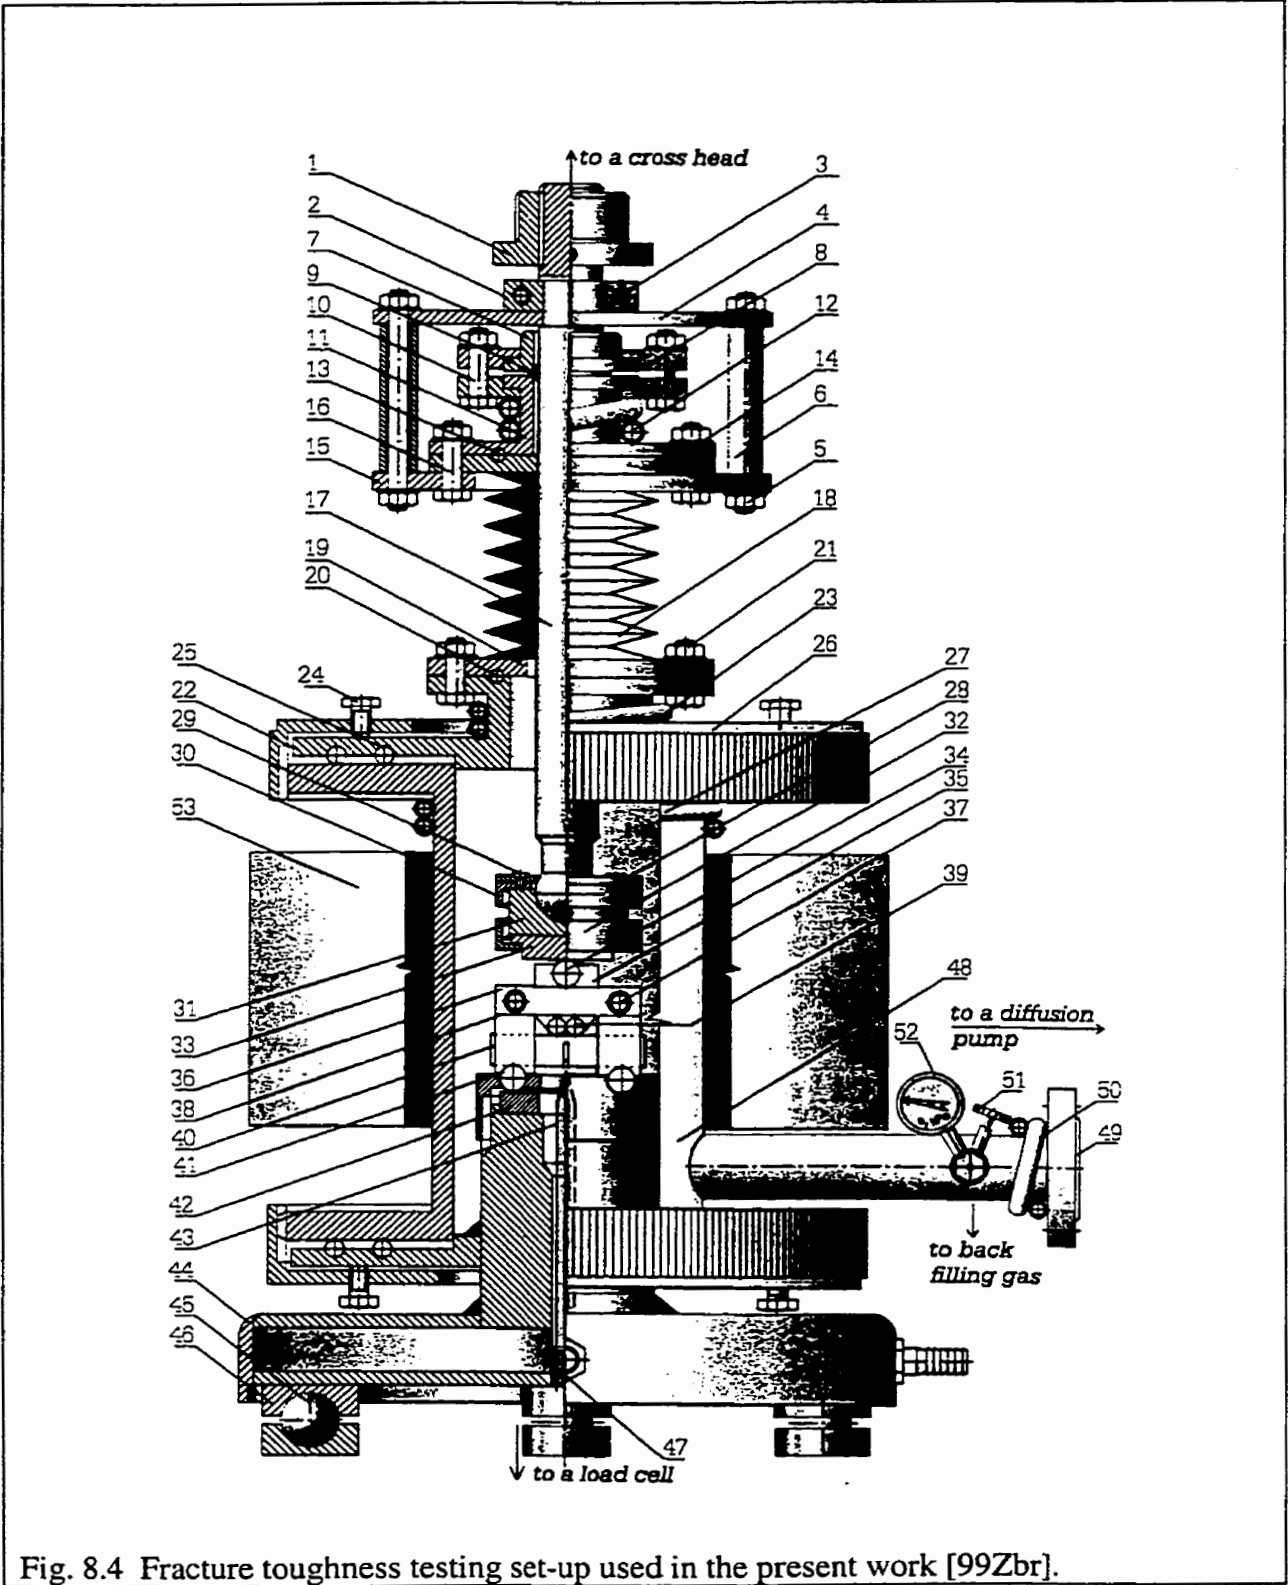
Fracture toughness testing set-up used in the present work [99Zbr].
